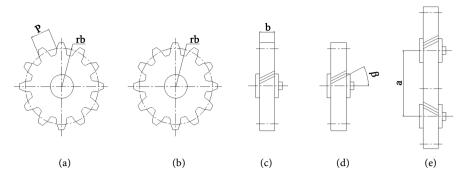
Design parameters for a gearbox. (a) module; (b) number of teeth z; (c) facewidth b; (d) helix angle β ; (e) centre distance a.
